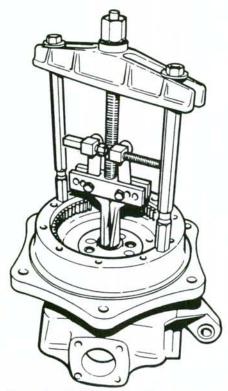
View showing bearing puller attached for pulling the ring gear from steering knuckle. Refer to text.
